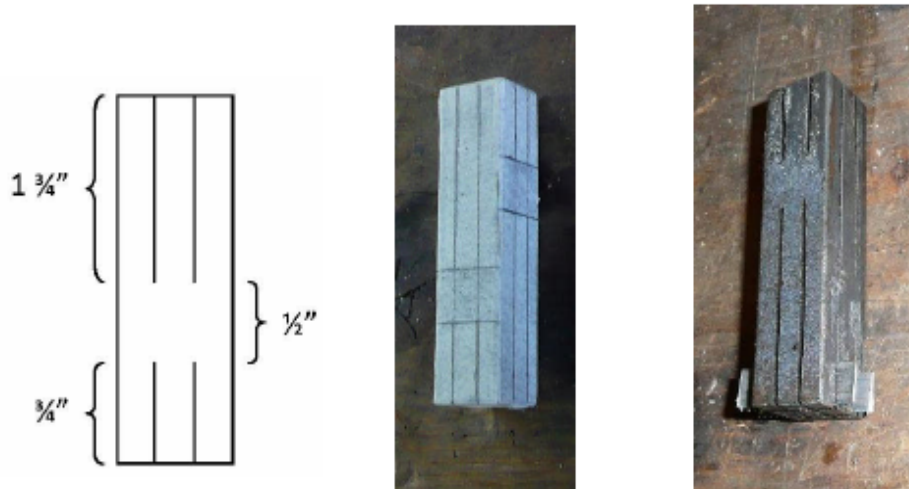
Cut layout (left), blank with marked cuts (center), cut blank with spacers (right)
